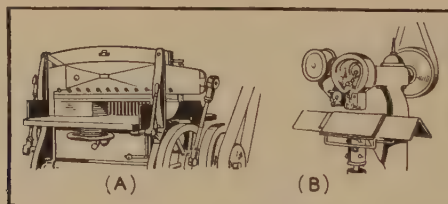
(A) Trimming machine; (B) wire stitching machine.
